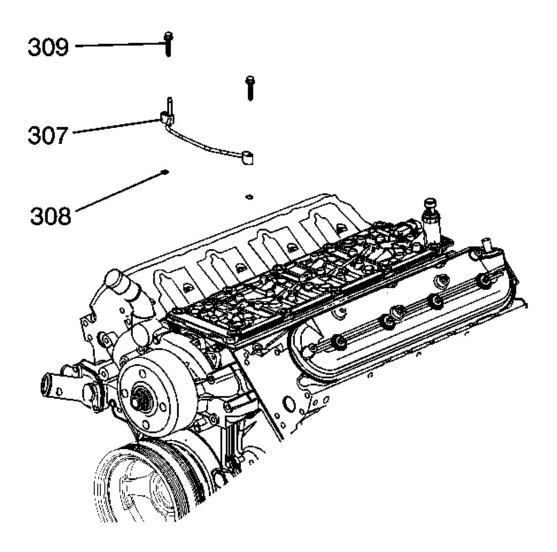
Engine Coolant Air Bleed Pipe Courtesy of GENERAL MOTORS CORP.
